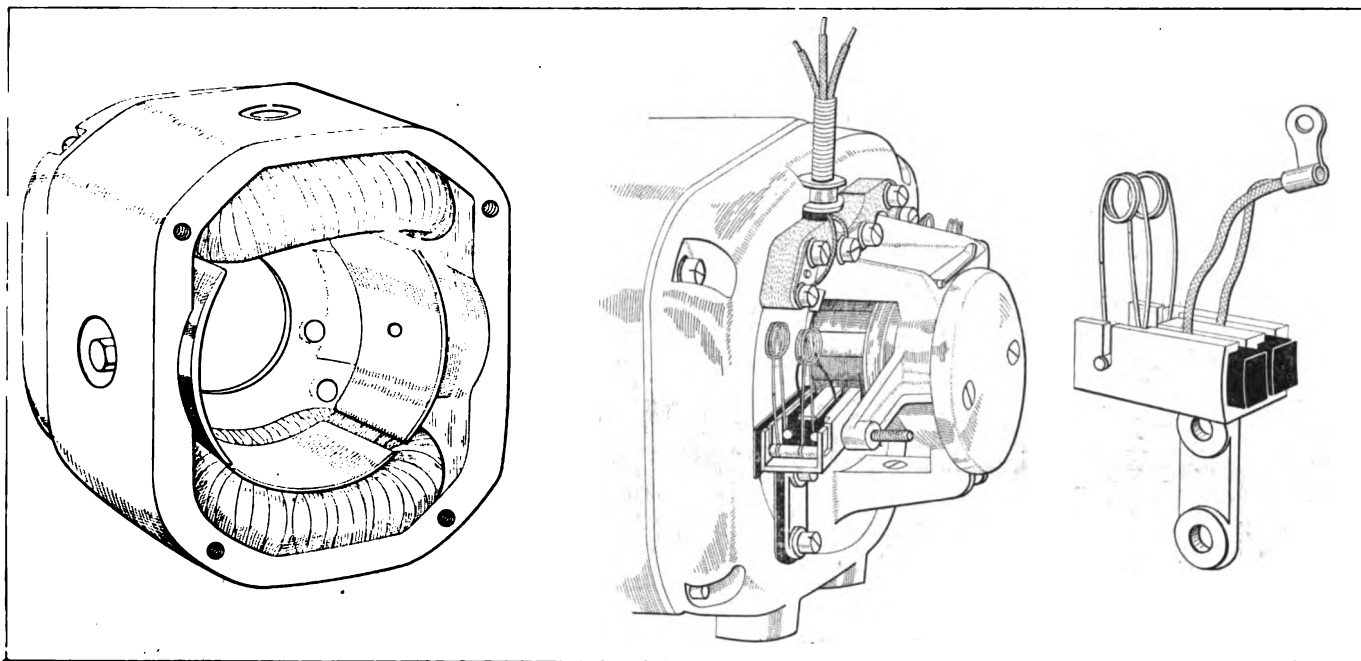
Field piece with polar extensions. Fig. 5—Commutator end, showing the brushes. Fig. 6—Details of the brushes and holders
